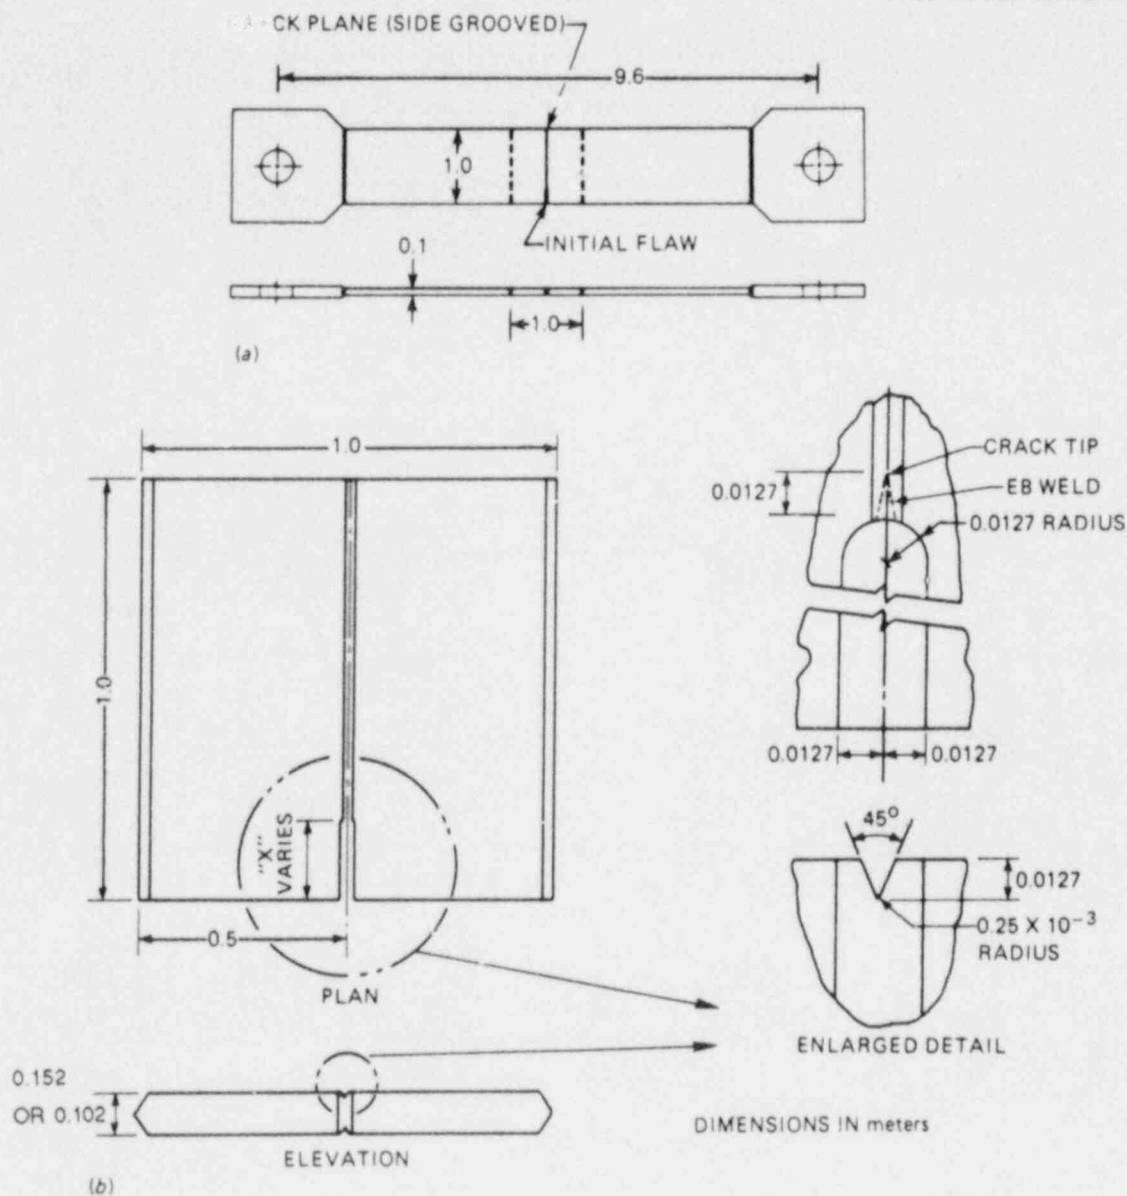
Schematic of HSST wide-plate crack-arrest specimen.
